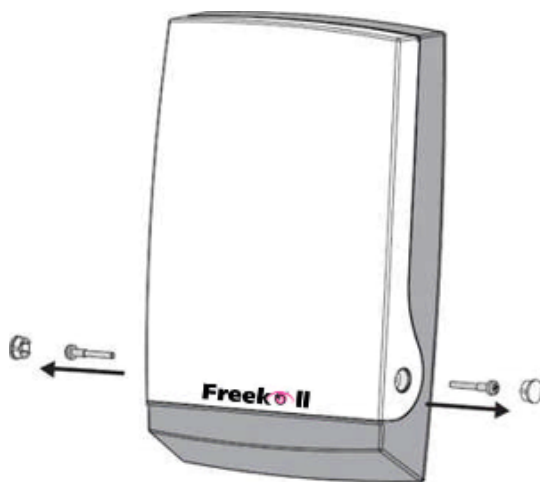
Siren Unit Installing – Screws activate the Tamperers
